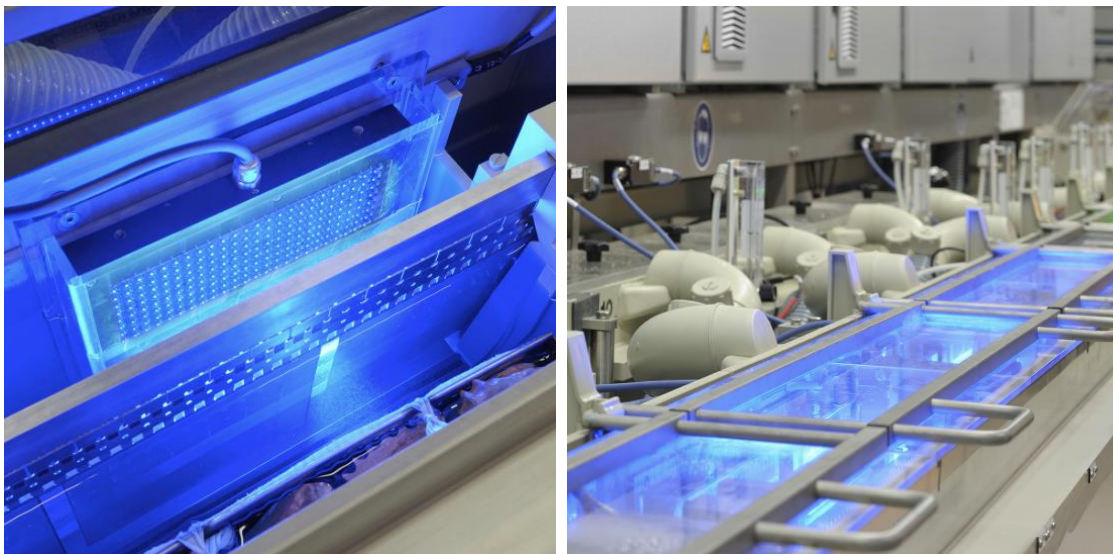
Meco DPL plating tool using a clip and immerse method (from [151]).
